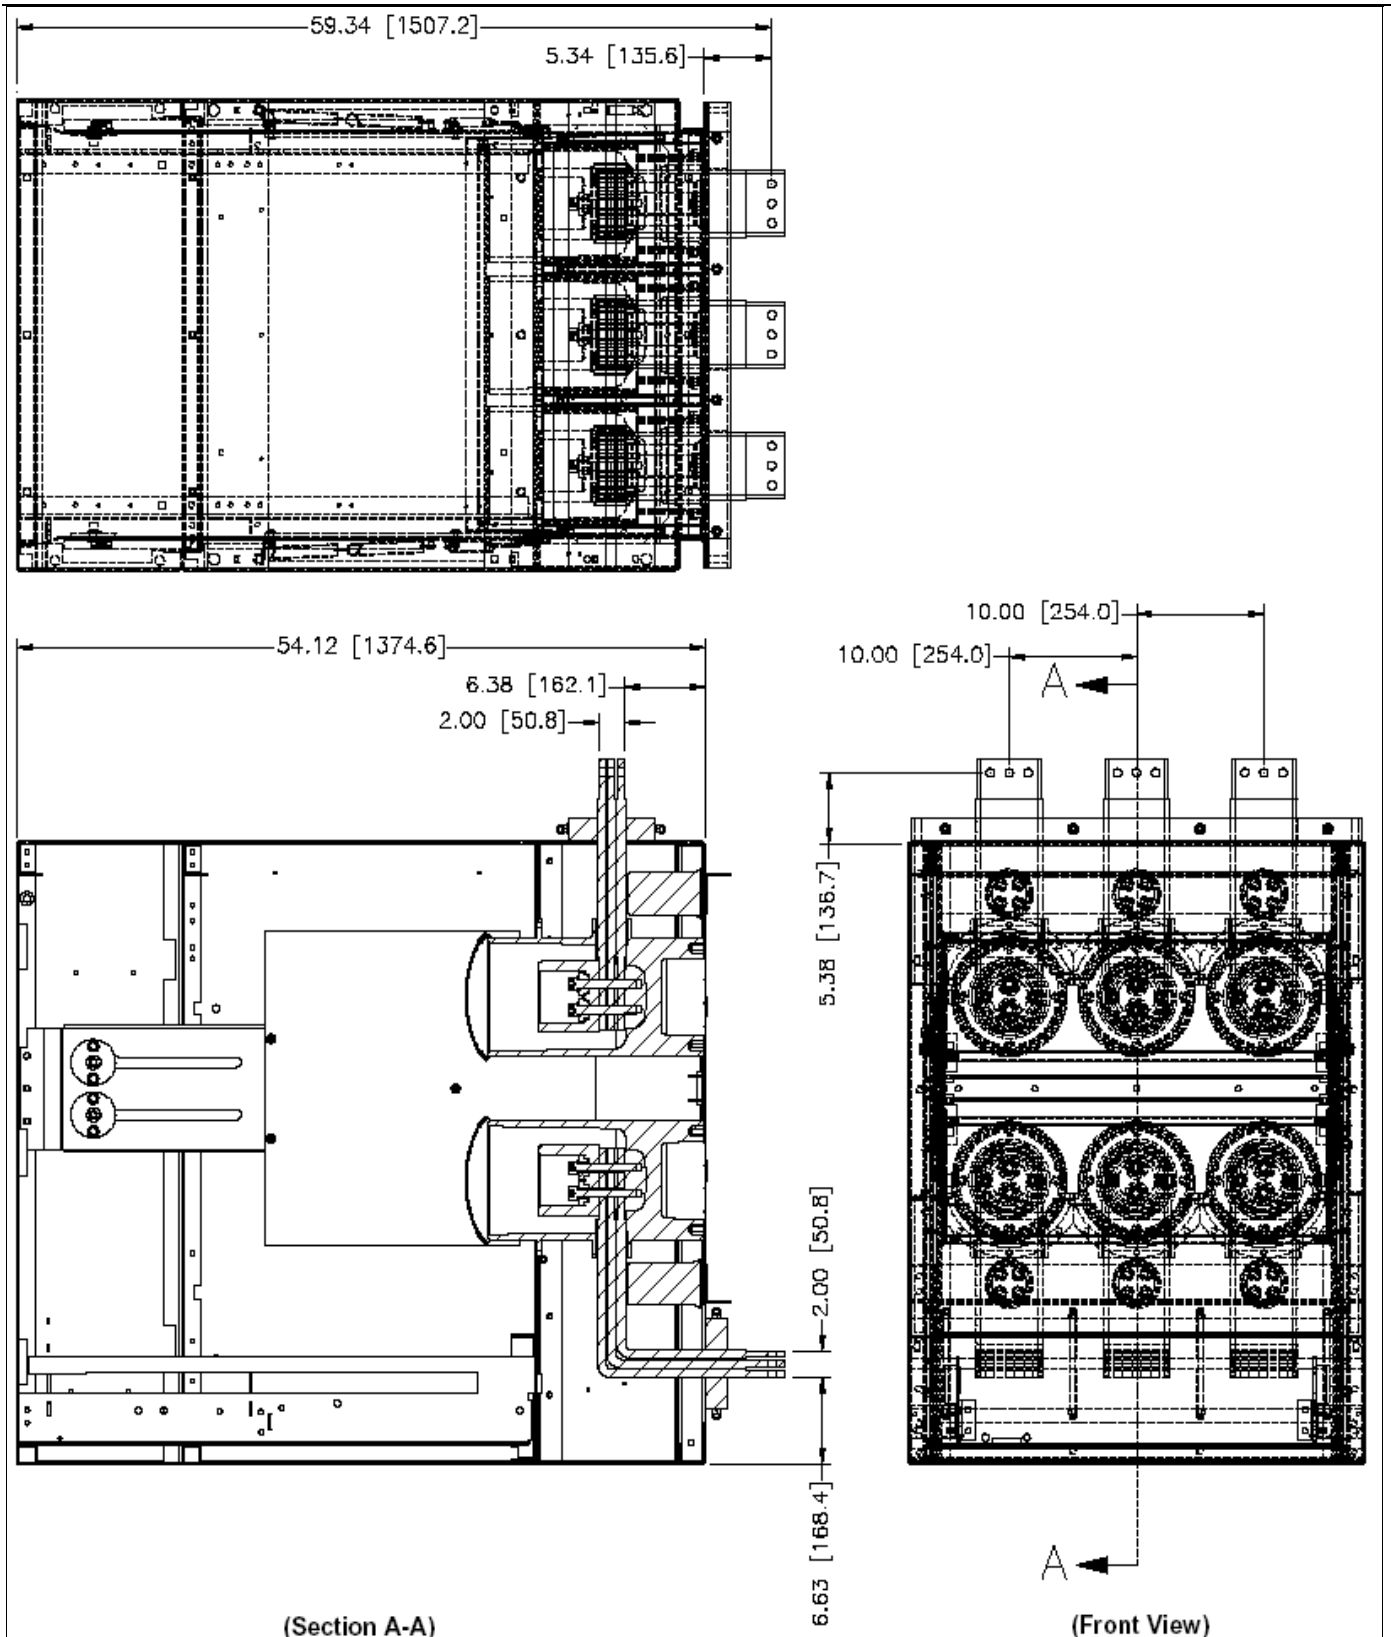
VCP-WG Draw out Breaker Module Outlines and Dimensions in inches [mm]
